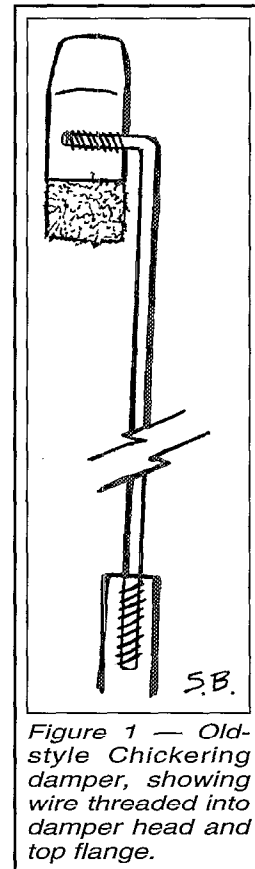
Old-style Chickering damper, showing wire threaded into damper head and top flange.
